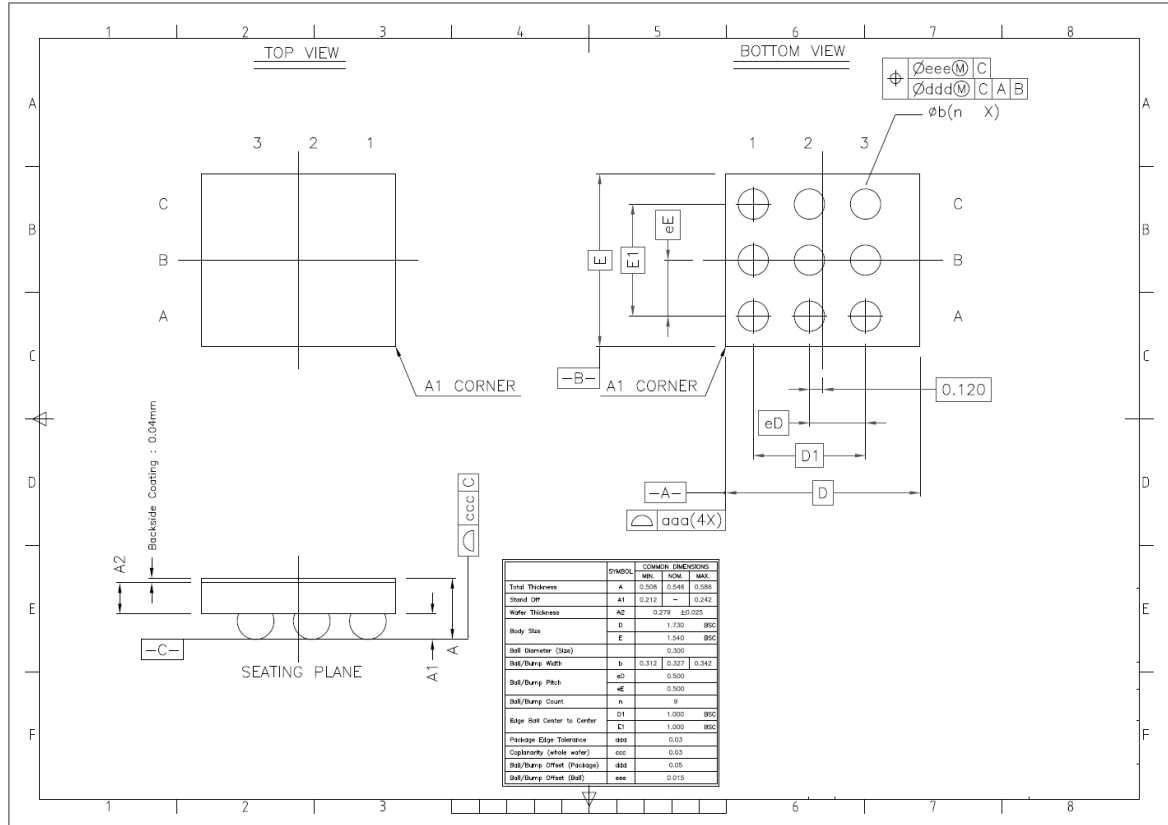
DA7202 package outline drawing (9-bump WL-CSP 0.5 mm pitch)
